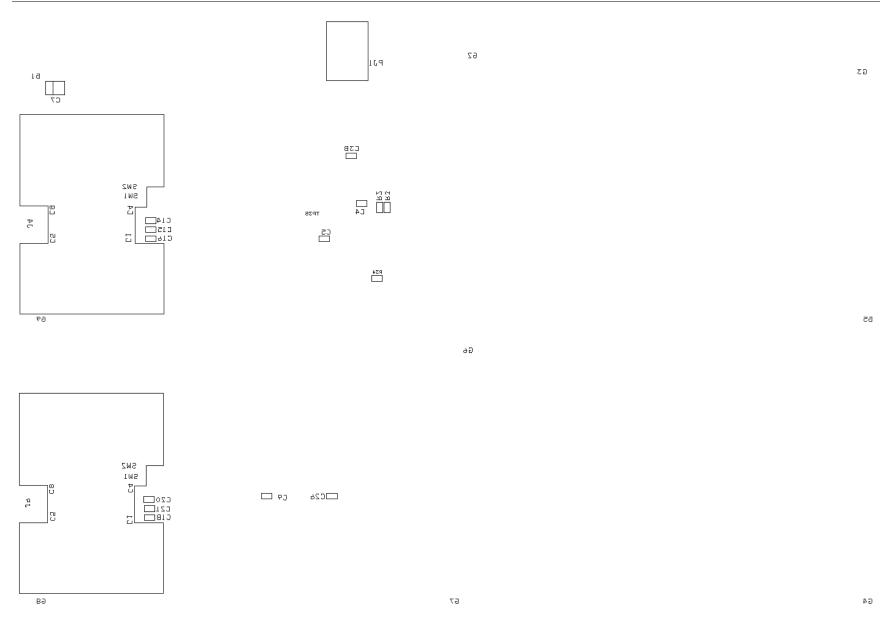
73S1215F Evaluation Board Bottom View (Silkscreen)
